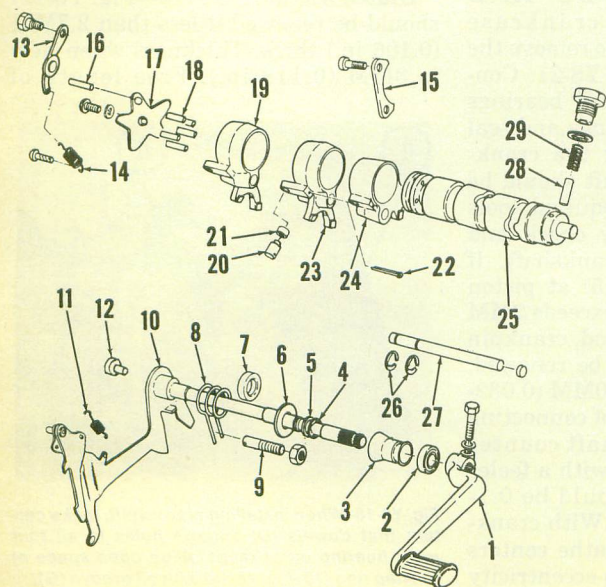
Exploded view of the gear shift assembly. Shift fork (19) moves gear (27—Fig. Y8-22), fork (23) moves gear (8—Fig. Y8-22) and fork (24) moves gear (20—Fig. Y8-22).
